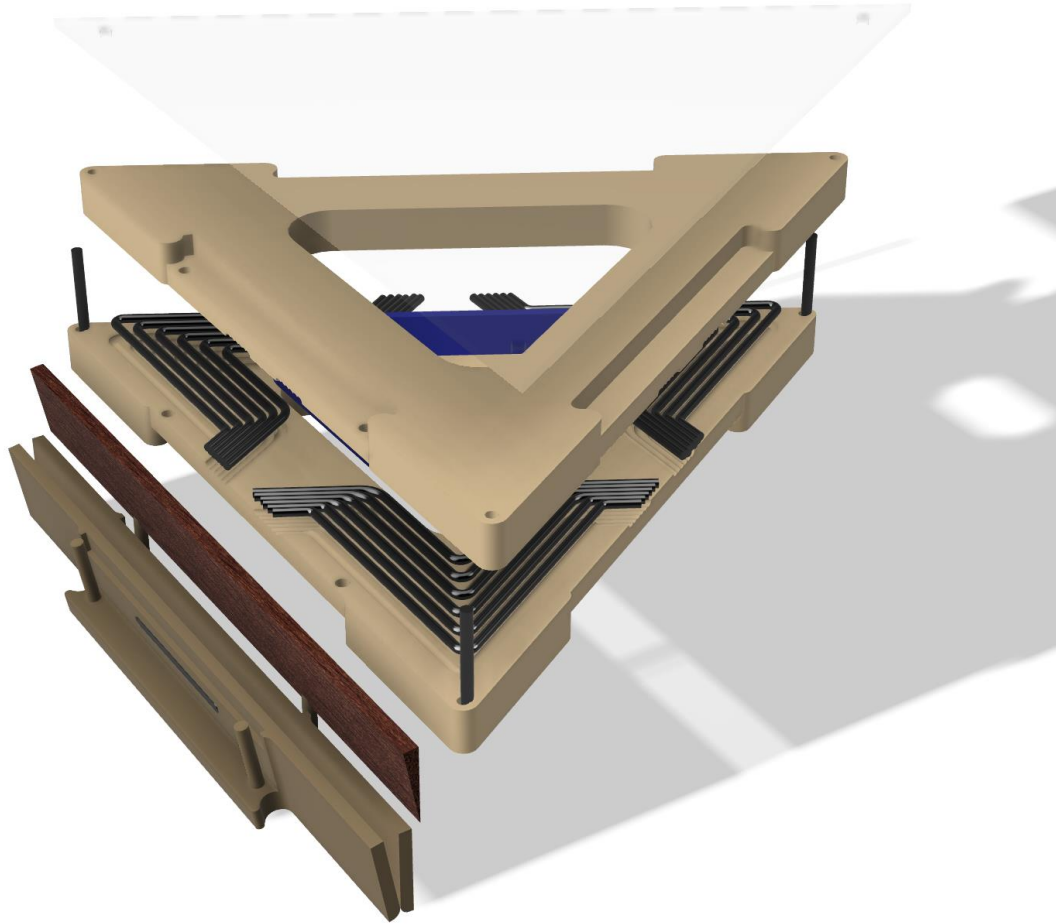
Shelter Design – Design of Triangular Module and Connector Assembly
